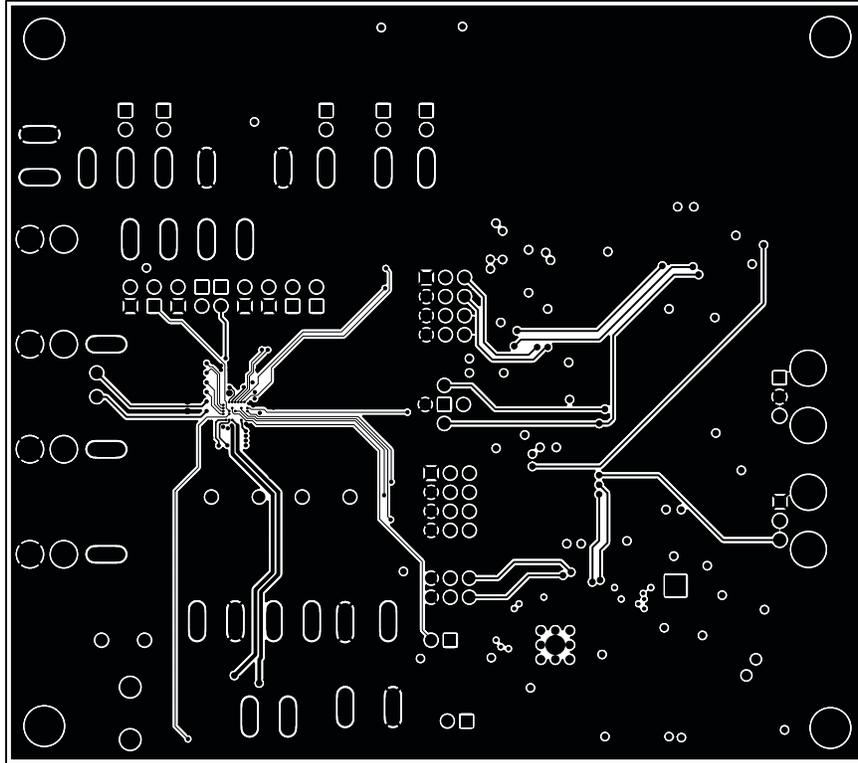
MAX9888 EV Kit PCB Layout—Power Layer 3
